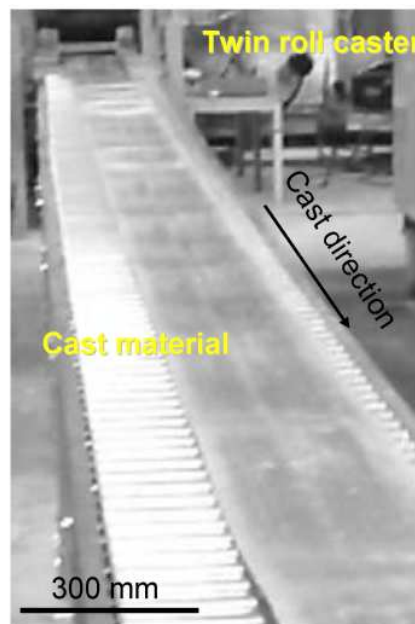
Twin-roll cast AZX611 Mg strip of thickness 2.5 mm and width 300 mm fabricated by using a pilot-plant twin-roll casting machine.
